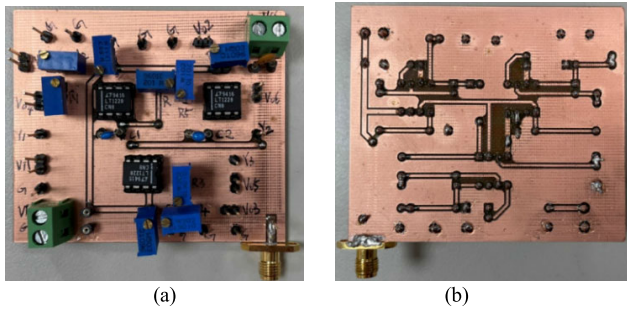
Second PCB prototype (a) top view and (b) bottom view of the measurement circuit in Fig. 3.
